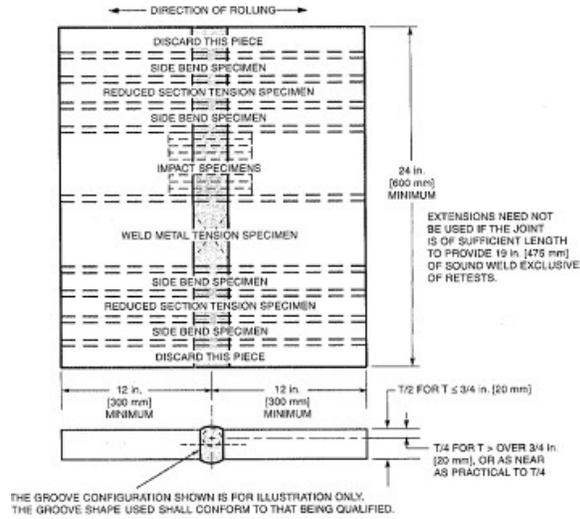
C—Location of Test Specimens on Welded Test Plate—Electroslag and Electrogas Welding—Procedure Qualification
